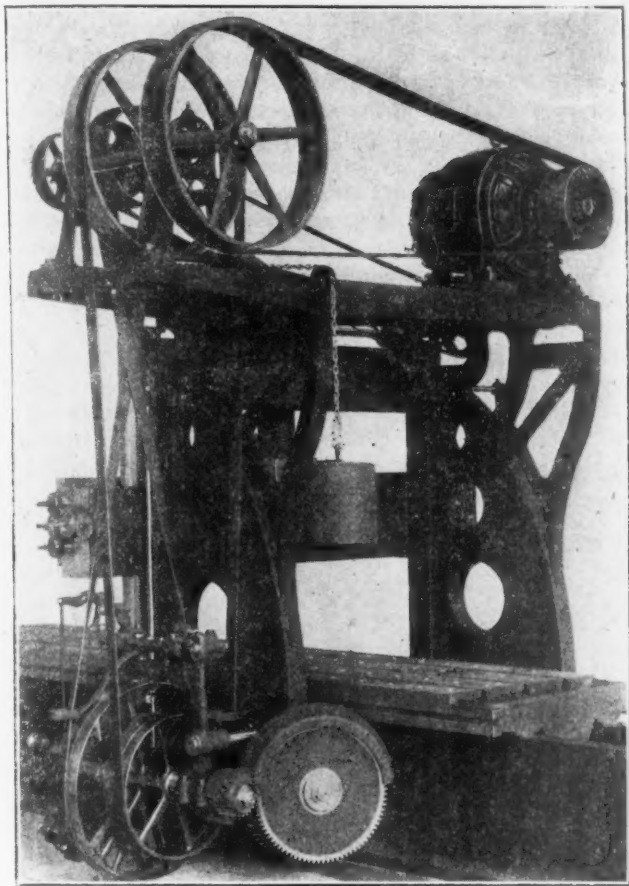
BELTED DRIVE UPON A GRAY PLANER—FLYWHEELS STILL RETAINED. JANTZ & LEIST CONSTANT-SPEED MOTOR.
